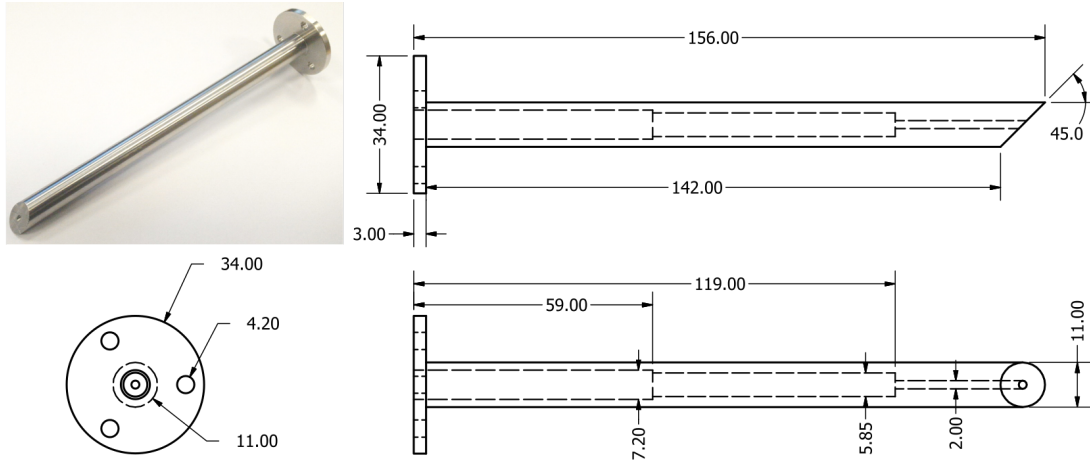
The differential pumping tube and its dimensions, with the technical drawing showing the shape and size of the inner tube.
